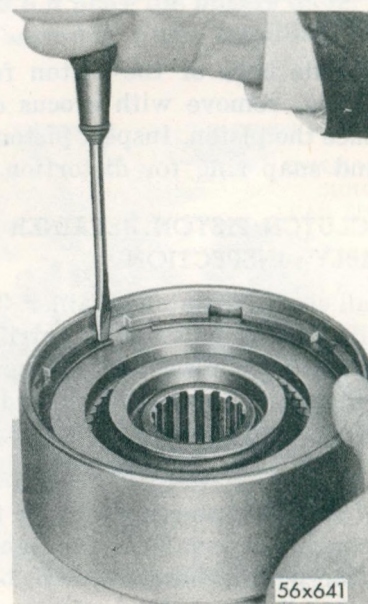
Removal and Installation of Rear Clutch Piston Retainer Snap Ring
